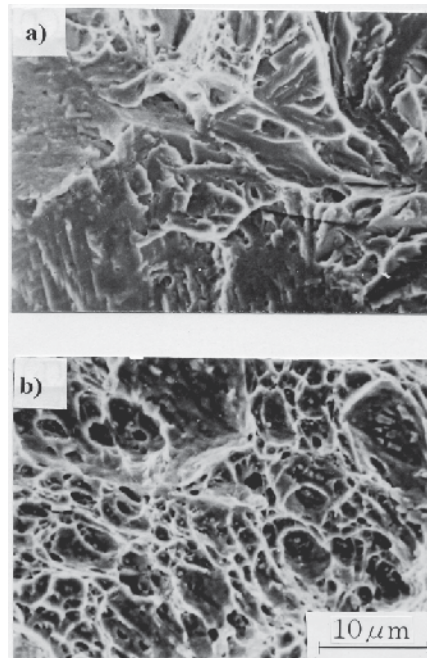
Impact fracture surface, SKD62[4]. a) RT b) 673K
